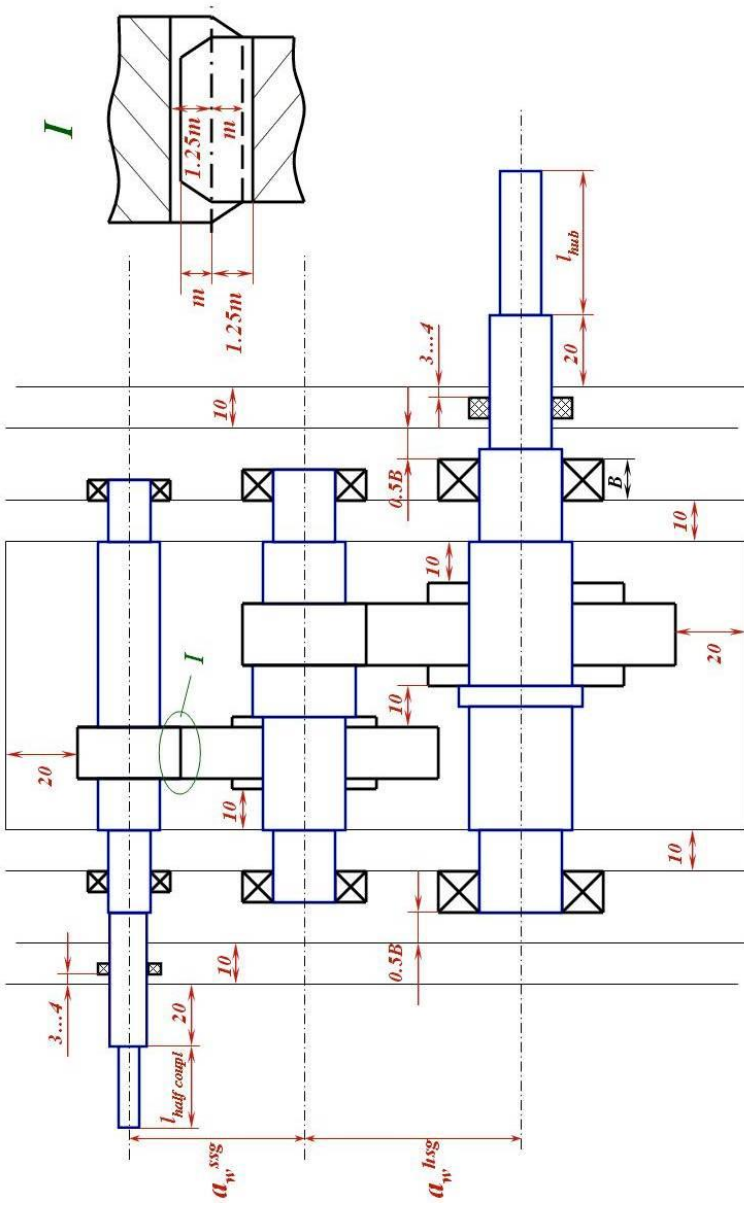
Sketch layout of double stage spur gear speed reducer
